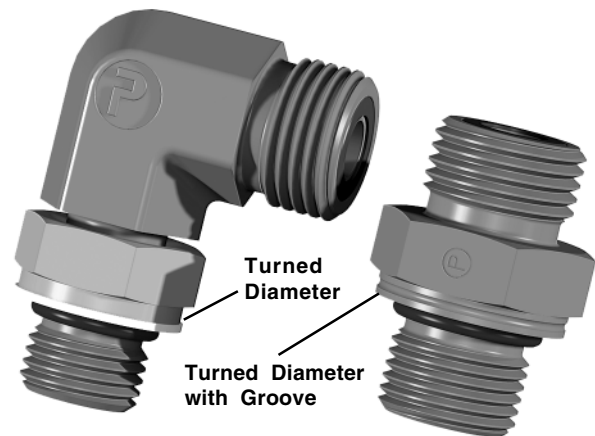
Metric Seal-Lok Straight and Shaped Connectors with Identification for use with ISO 6149-1 Port
